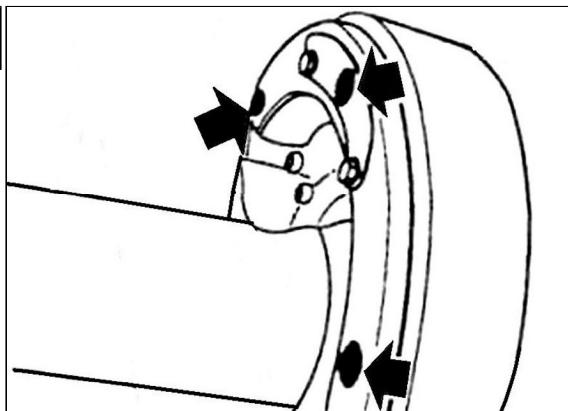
Plugs of inspection holes for measurement of the brake lining thickness – installation
